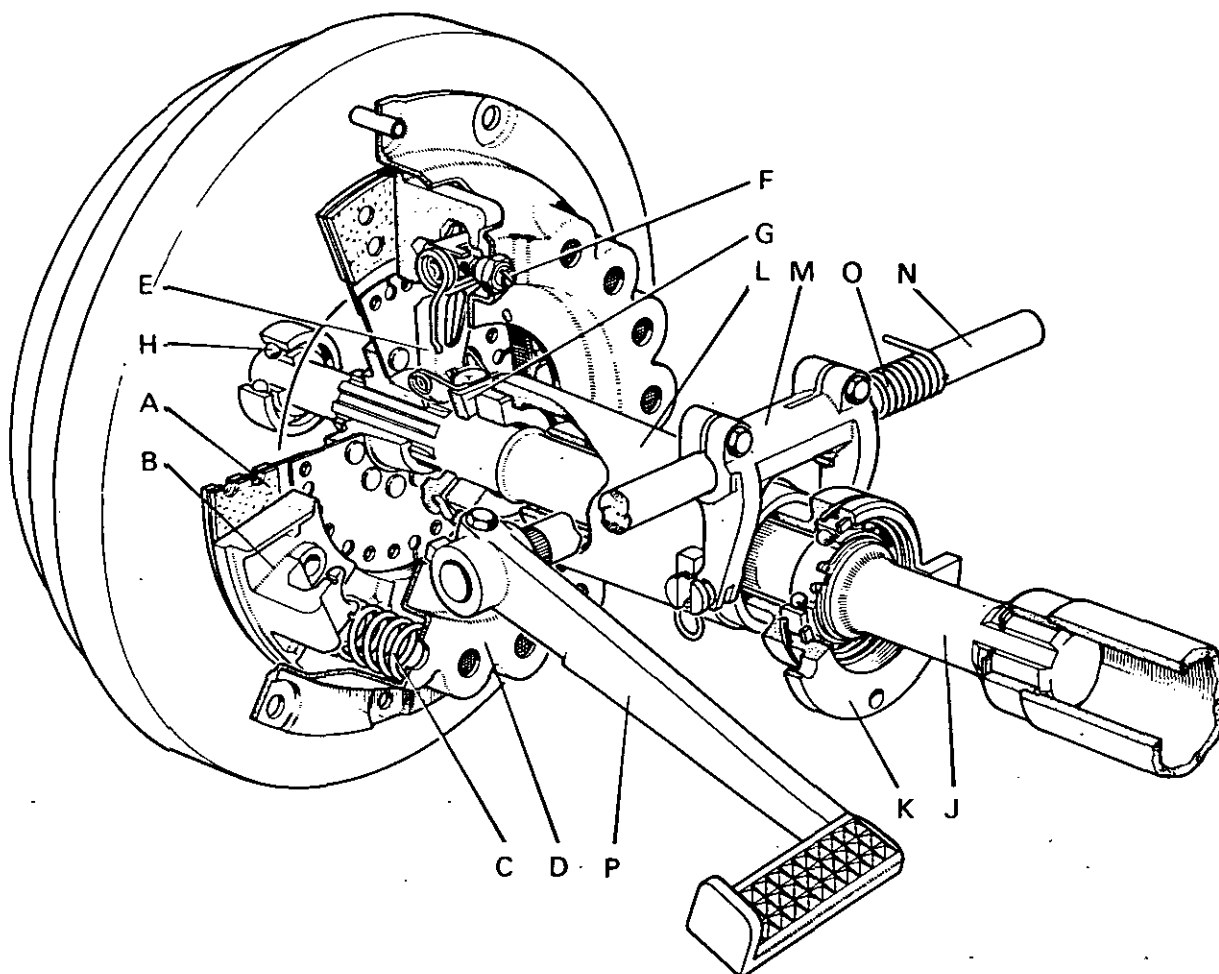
SINGLE PLATE CLUTCH — 770 TRACTOR
